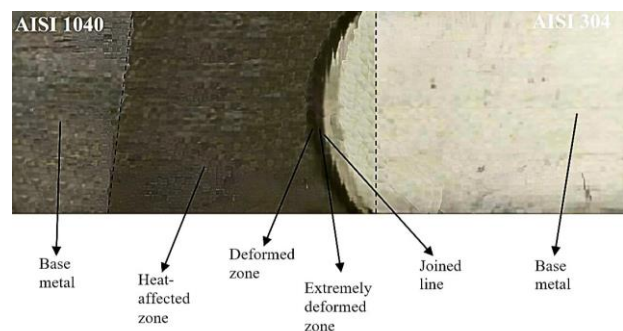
Schematic picture of the joint cross-section in friction welded samples
